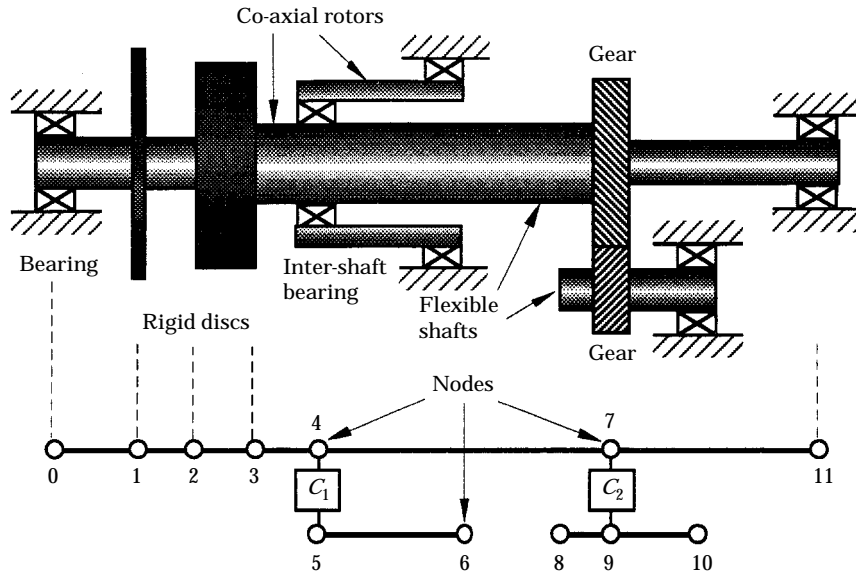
A hypothetical complex rotor system: C_1 —coupling of nodes 4 and 5 by the inter-shaft bearing; C_2 —coupling of nodes 7 and 9 by the gear pair.
